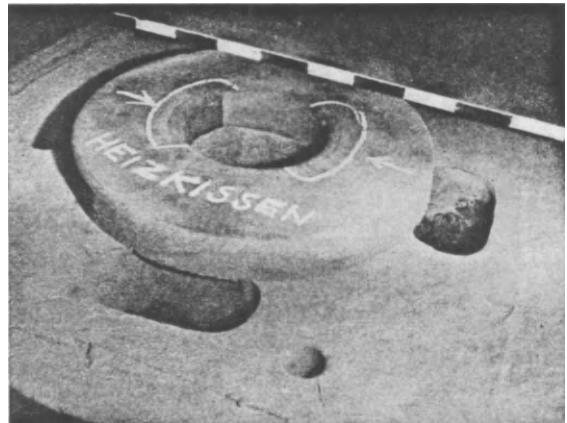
Exothermic pads in the mould. Exothermic pads
